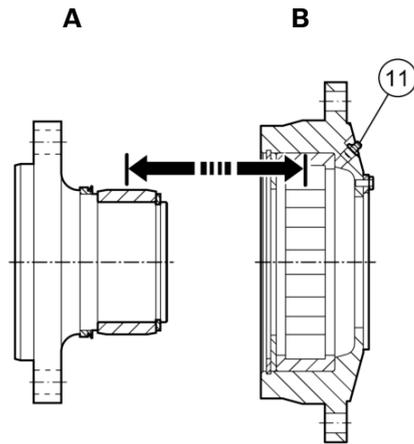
Counter-bearing with cylindrical roller bearings, consisting of part A and part B
